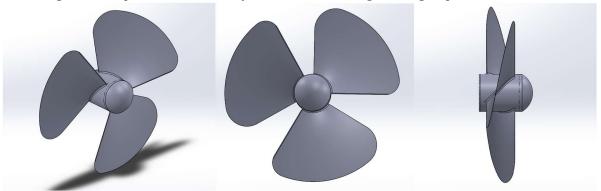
Isometric and Orthogonal Views of Fan Blades in SolidWorks
